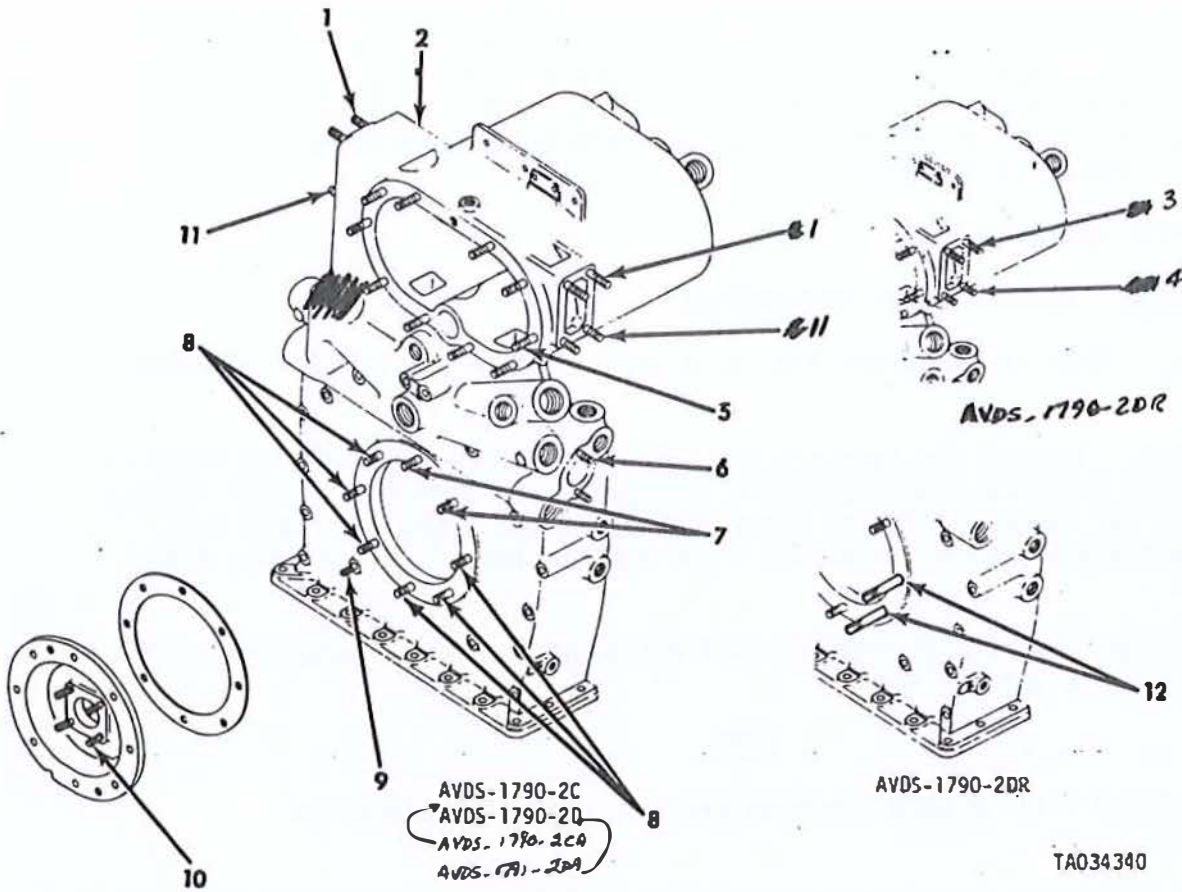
Crankshaft damper and oil filter housing standard stud identification.
